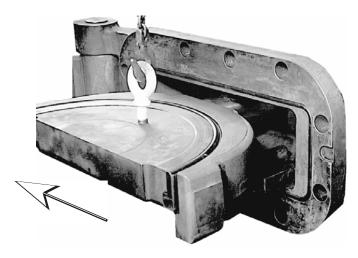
Install Eyebolt and Slide Ram Horizontally
